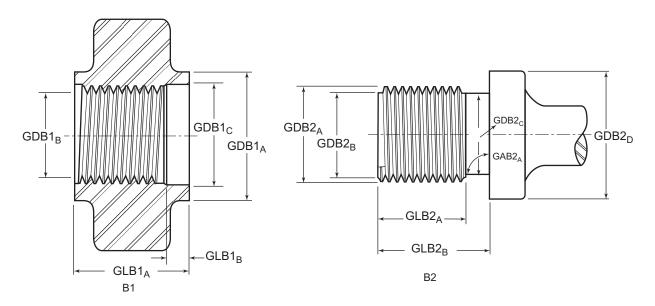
Go Box-Thread Gauges (For Gauging Box Connections)
